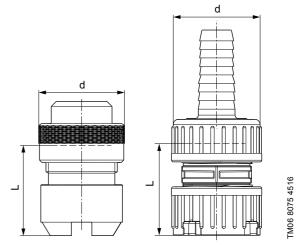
Foot valves: stainless steel (left), PE/PVDF (right)
